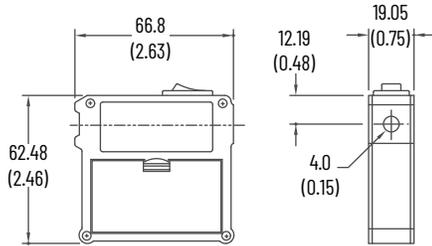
Laser Alignment Tool Clamp 450L-ALAT-C
